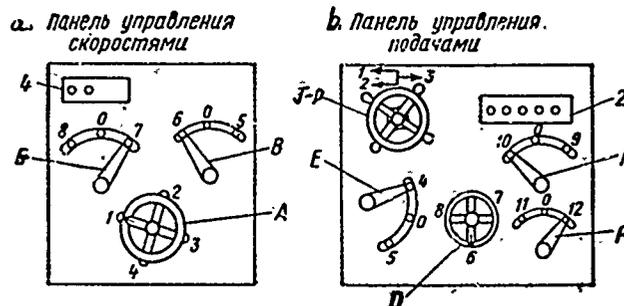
Control panel of horizontal drilling and boring machine -- 2 (see Fig. 111)
